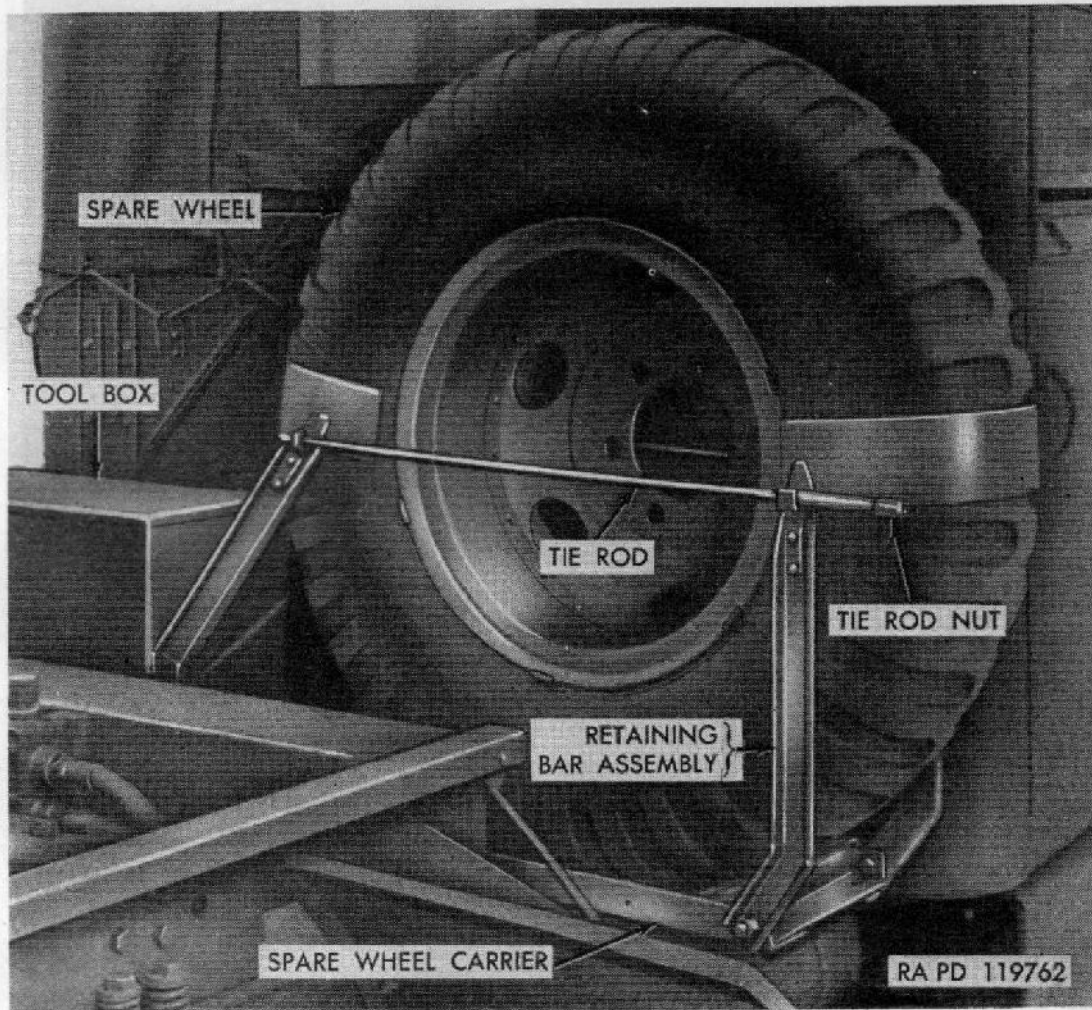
Spare wheel carrier with wheel—M47 and M59.
